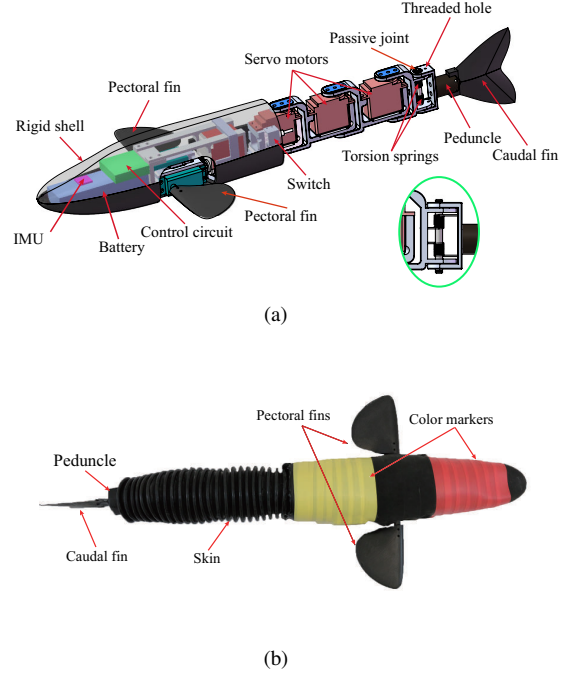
Multi-joint robotic fish with a compliant passive joint. (a) Mechanical structure. (b) Prototype with color markers.
